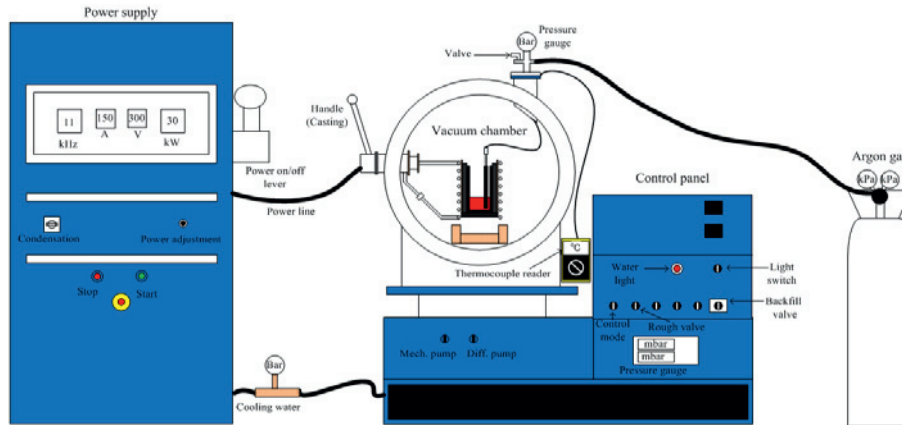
Furnace apparatus. Drawing of furnace by Buhle Xakalashé.
